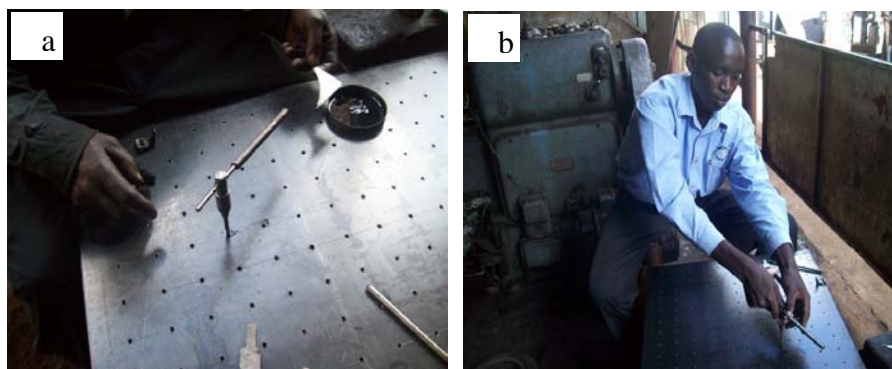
Threading of the optical table base setup: (a) Greasing M5 holes before drilling; and (b) Manual tapping of table top using M6 threads.
